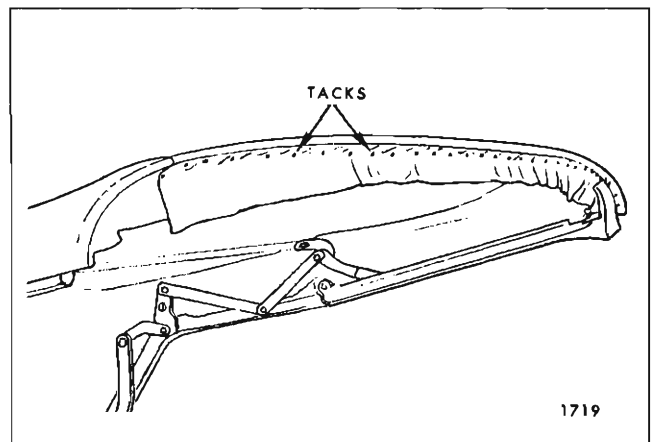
Installation of Top Material to Front Roof Rail
